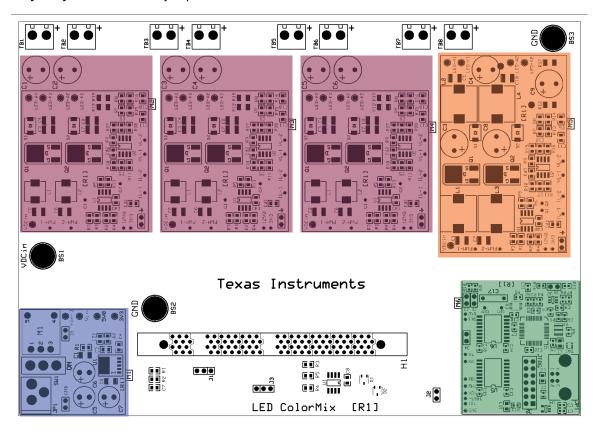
Multi-DC/DC Color LED Board Macro Block Locations
